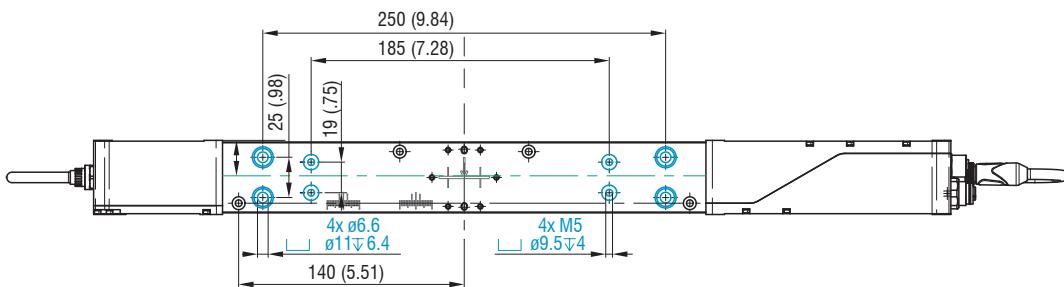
Dimensional drawing of mounting rail ODC2700-10, ODC2700-40, optional mounting
